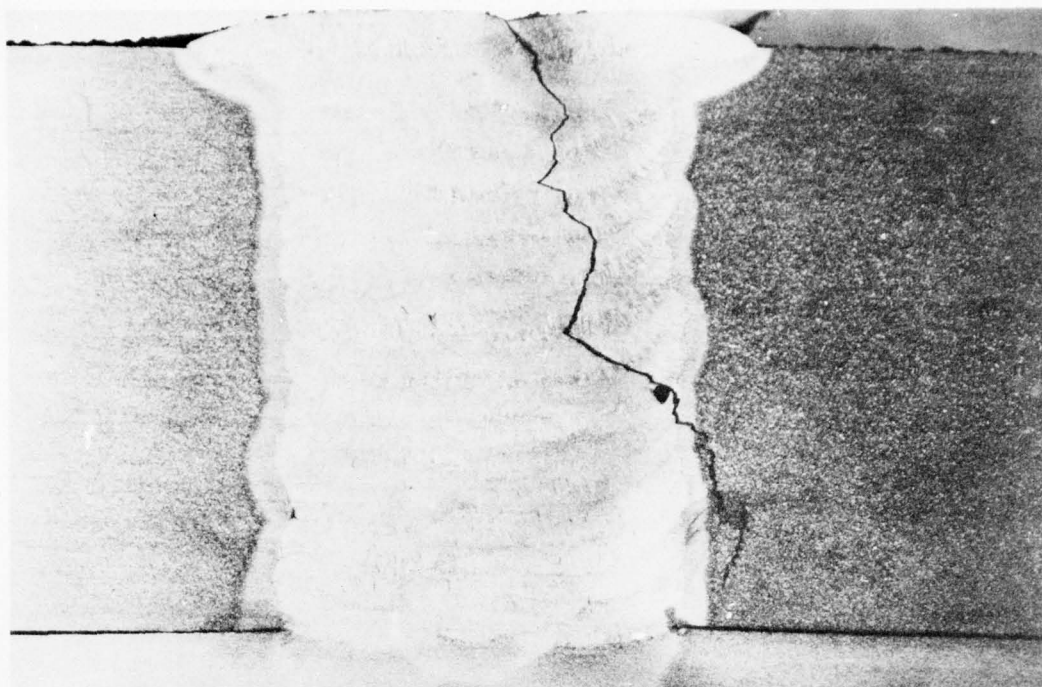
Cracking of multipass, submerged arc weld due to high restraint—1.5-in. (37 mm) plate.
